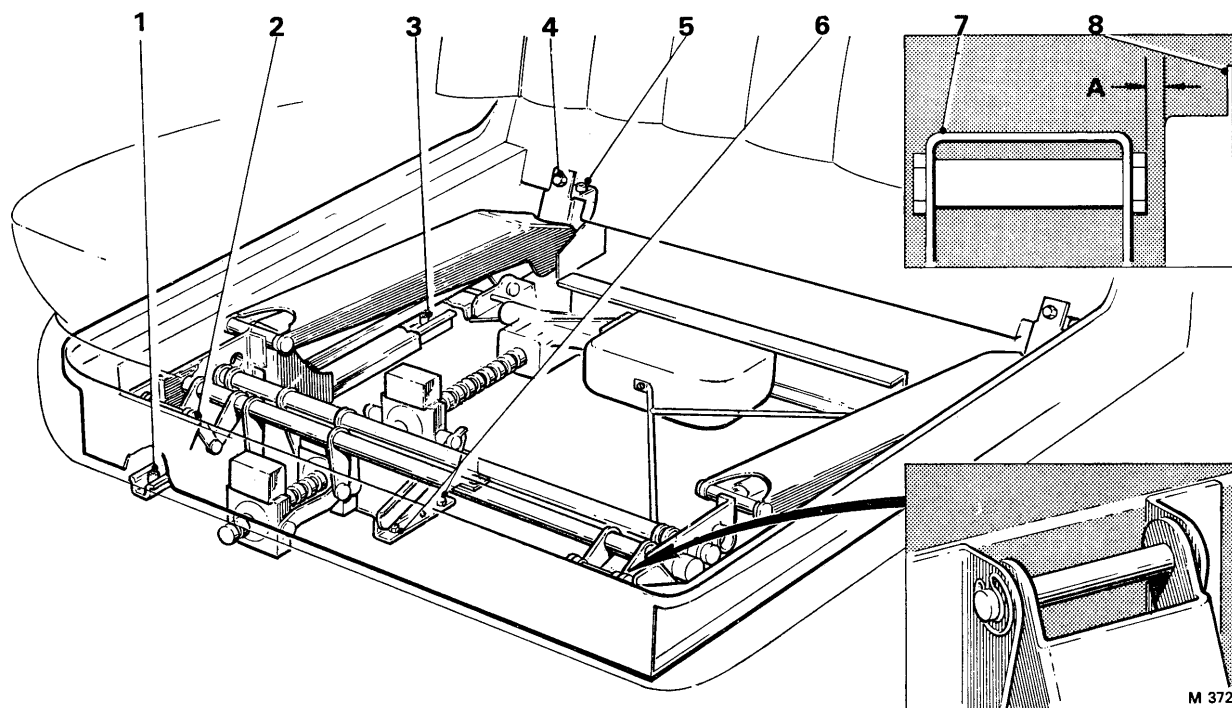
FRONT SEAT MECHANISM (4-Door Saloon and Long Wheelbase Cars after Car Serial Number 9617)
